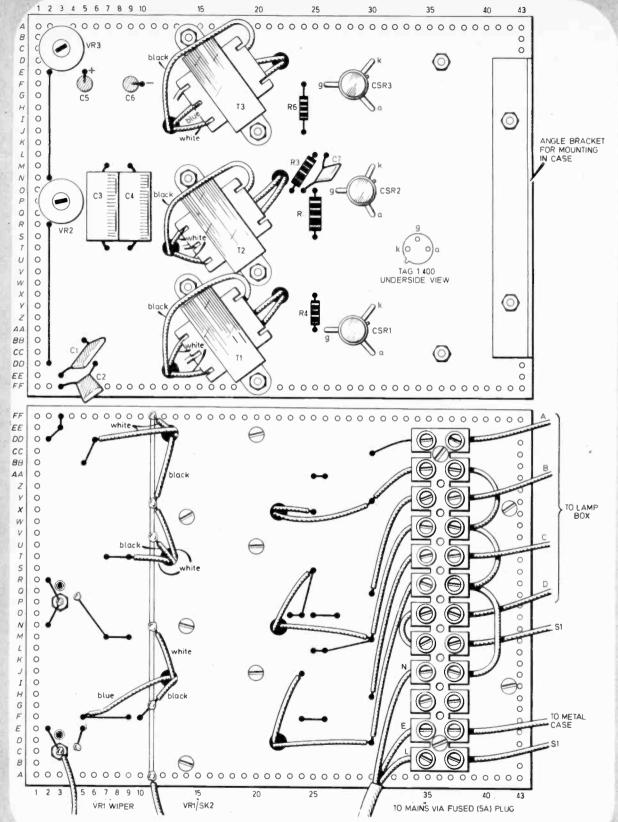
Layout and wiring of the complete circuit board. The spare wires from the transformers can be cut off as shown.
